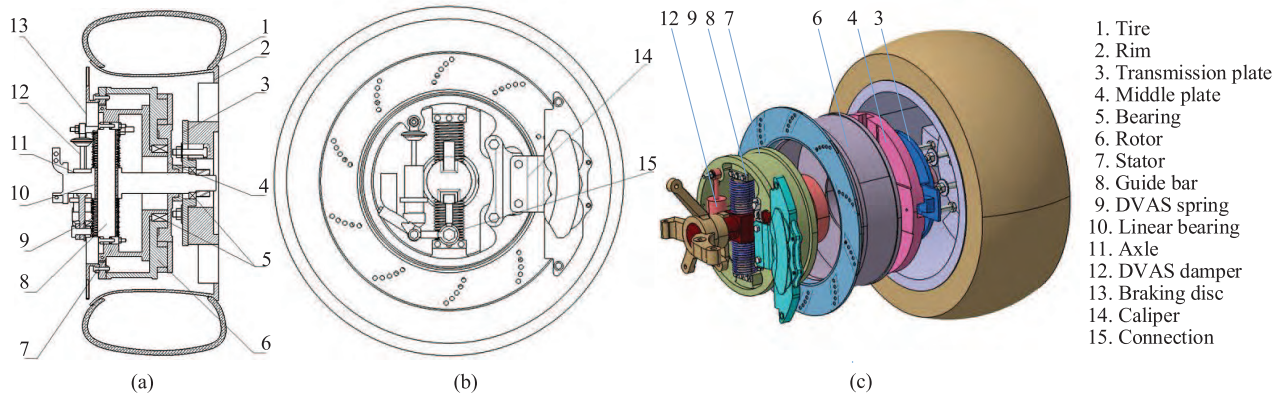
Structure of the DVAS based IWM-suspension system, (a) Side view, (b) Front view, (c) Exploded view.
